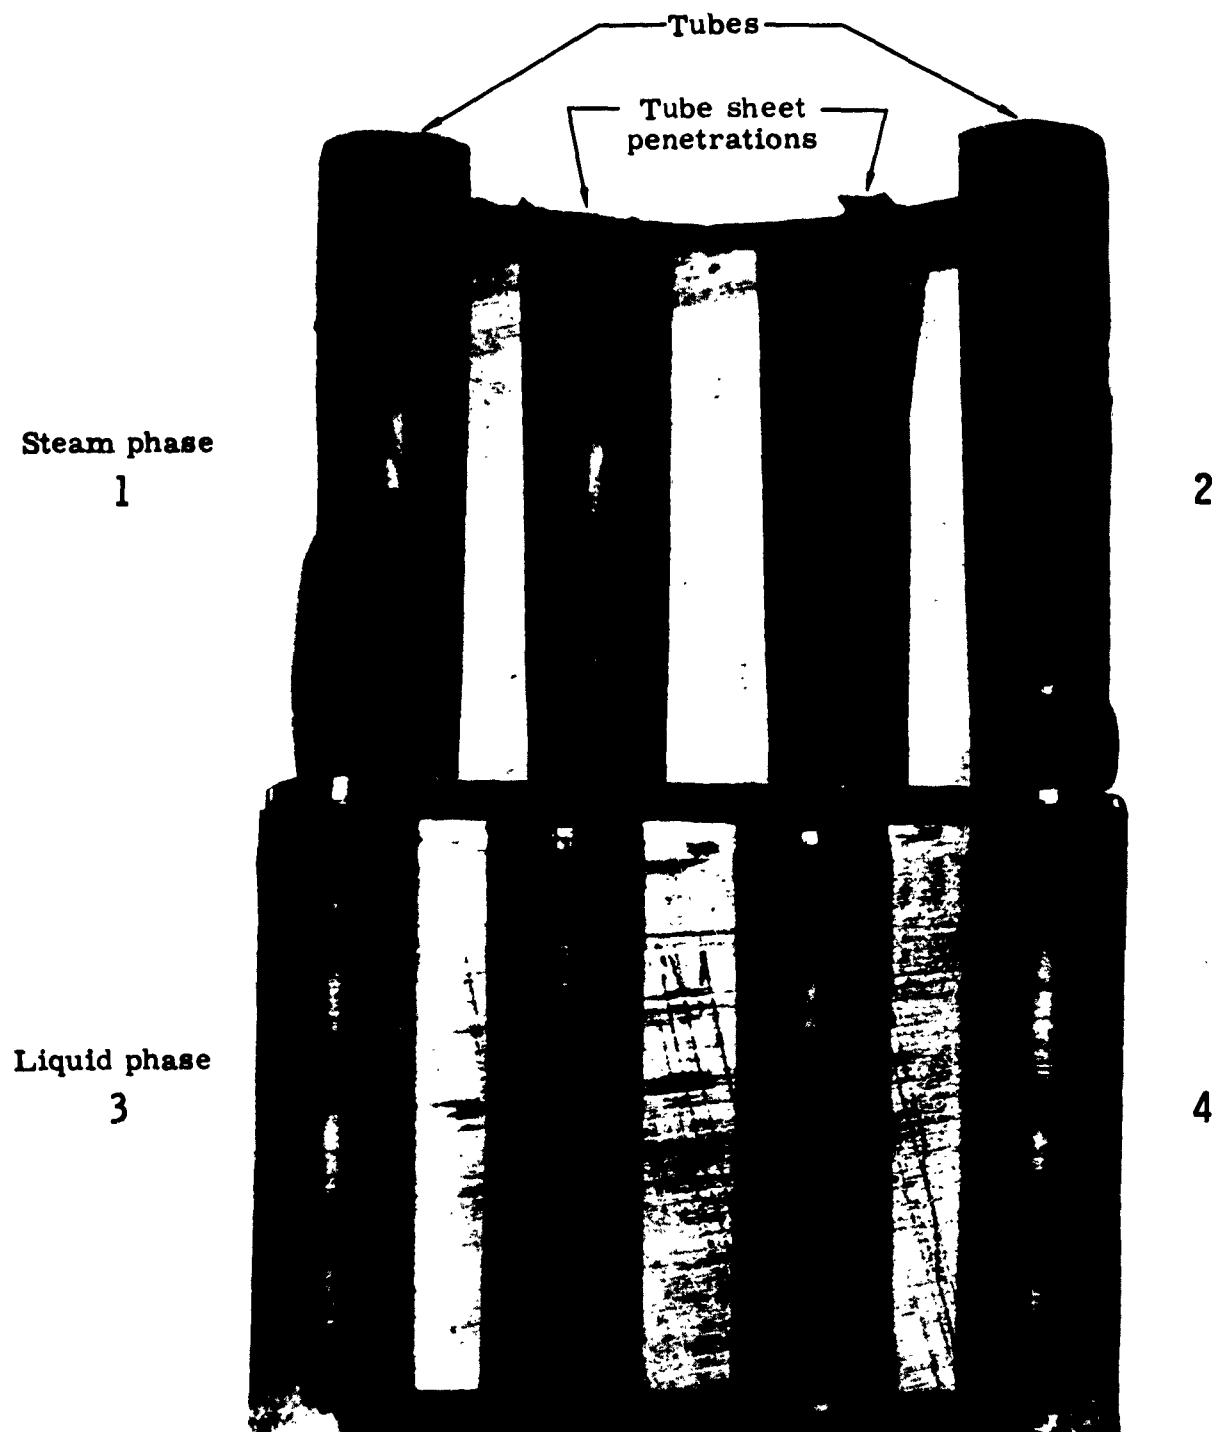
MIN 15--Longitudinal Cut Through Tubes in the Tube Sheet
